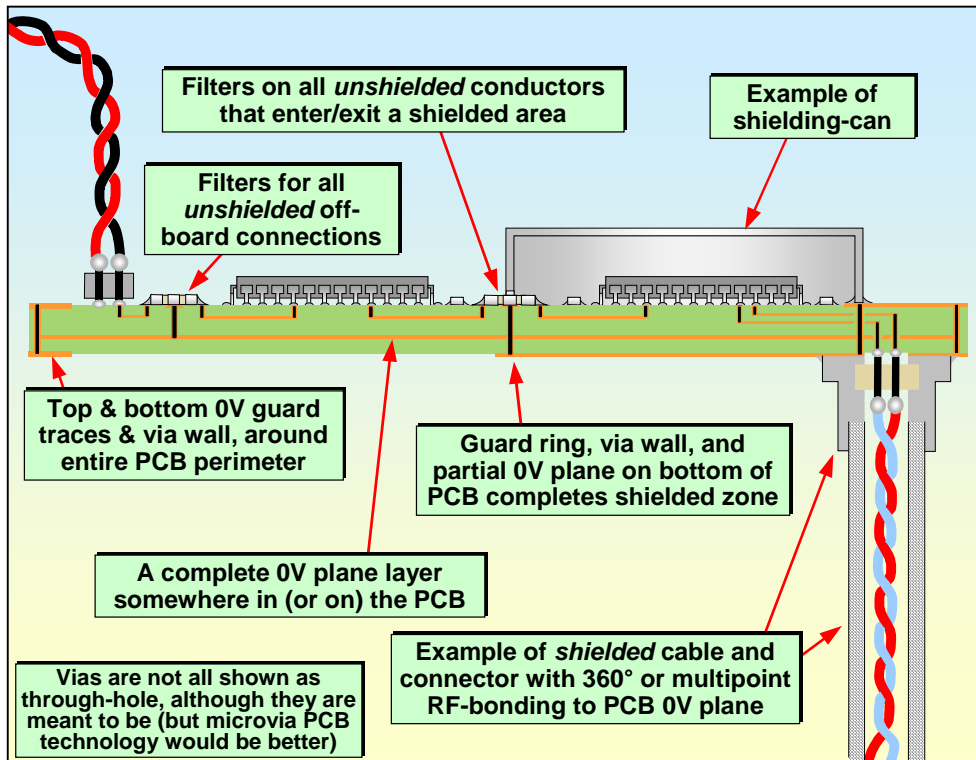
BB Example of a partially-shielded PCB assembly, with filtering of traces and cables
